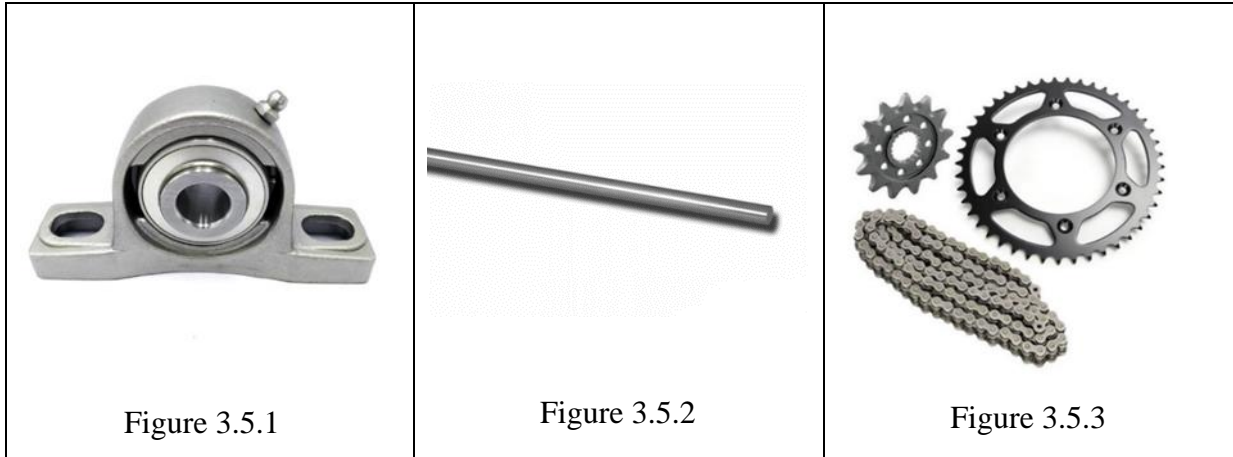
shows a pillow block bearing. Pillow block bearing is used to provide load support for a rotating shaft. Figure 3.5.2 shows a stainless-steel shaft. Stainless steel shaft is used as a connecting rod to transfer the power to pump. Figure 3.5.3 above shows a set of sprockets. Mechanically power transmission was applied to the Wheel Sprayer to ensure this project is free from any power source from battery or petrol. When there is no use of dry cells and fuel, this project is also environmentally friendly. Things that are combined to make the transmission part are bearings, a set of sprockets and a shaft. So, when the Wheel Sprayer is push forward or backward, this transmission part will make the tank mechanically pump.
